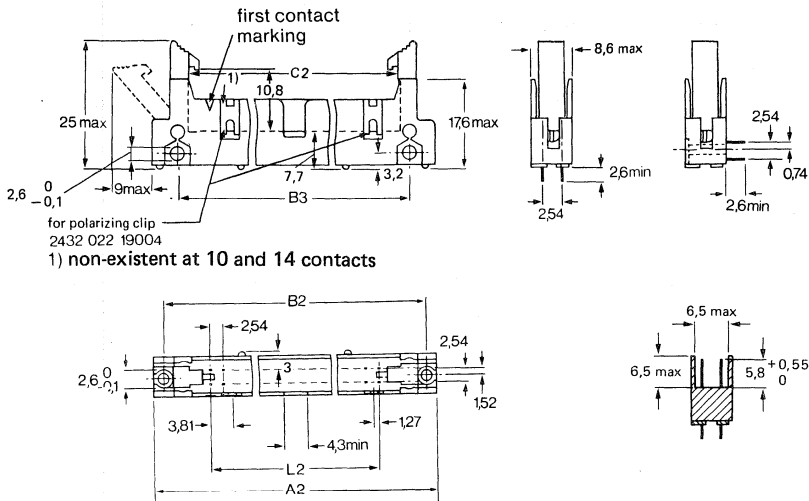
Male header with dip-solder pins, and clamp/ejectors (2432 022 19001) for cable connectors without strain relief; see Table 6 for dimensions A2, B2, B3, C2 and L2.
